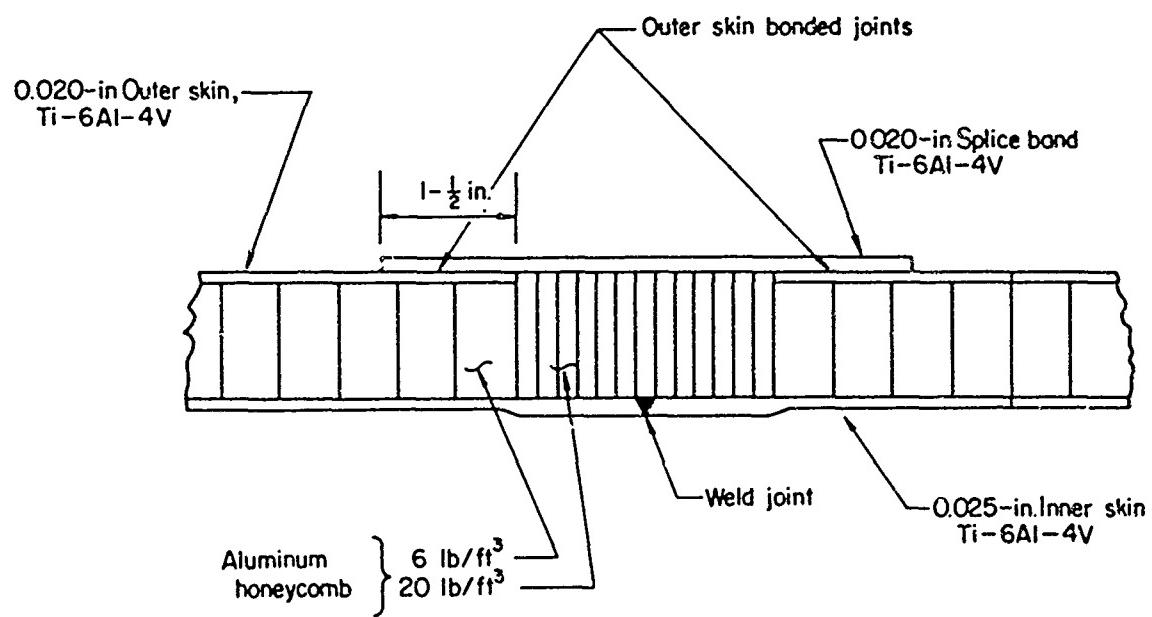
CIRCUMFERENTIAL JOINT IN LARGE HONEYCOMB CYLINDER (REF. 33)
